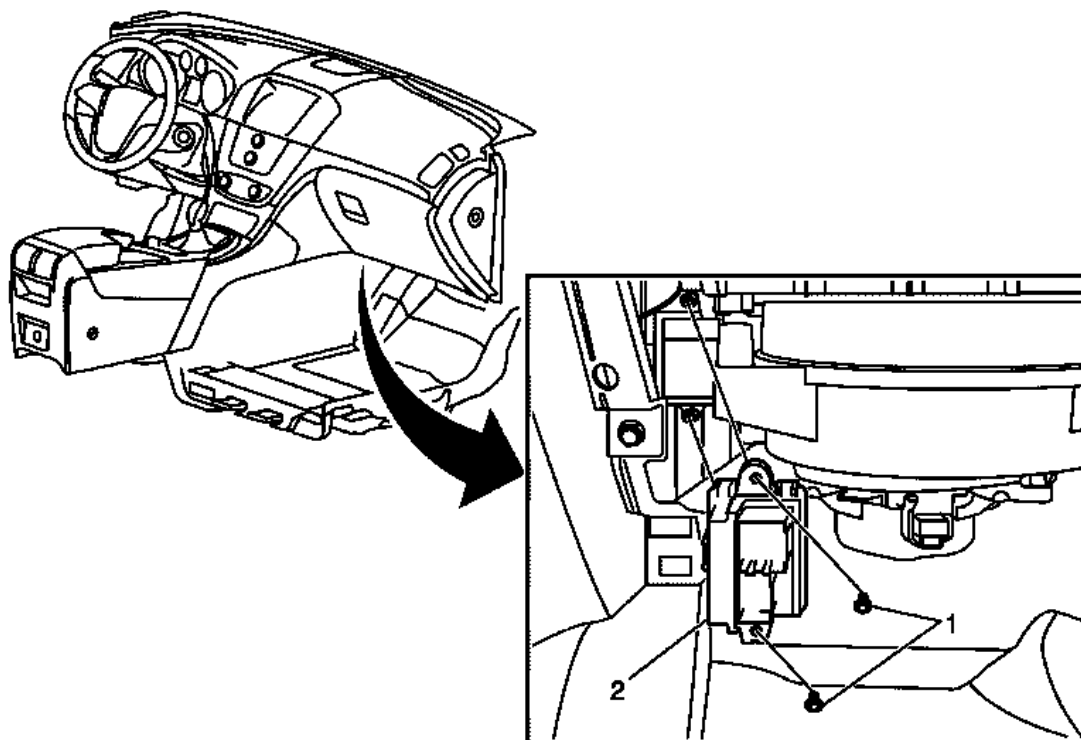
Heater And Blower & Air Conditioning Control Module With Fasteners
